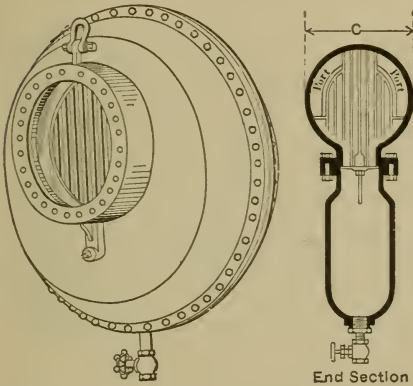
Vacuum Oil Separator for Horizontal Pipes 18 inches and larger.
